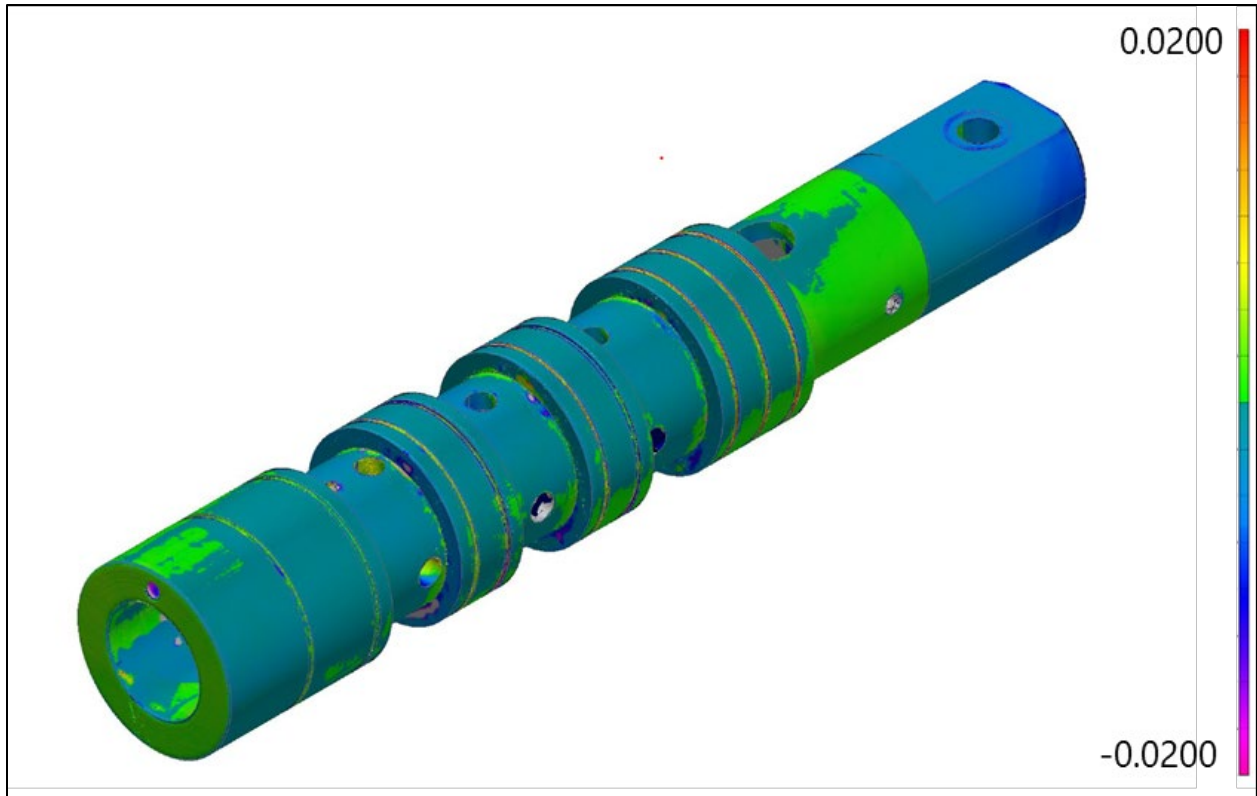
Example 3D scan of as-machined pilot valve sleeve assembly. The greatest value on the color scale (red) is +0.0200 inches. The lowest value (pink) is -0.0200 inches.
